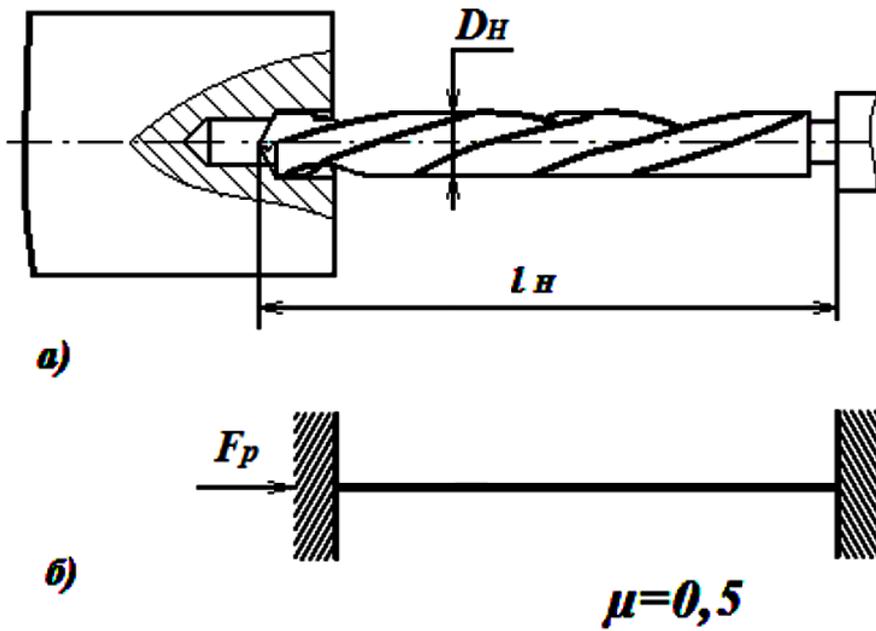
Structural design for the second manufacturing operation when the shank bit enters the part: a) drilling diagram; b) structural design
